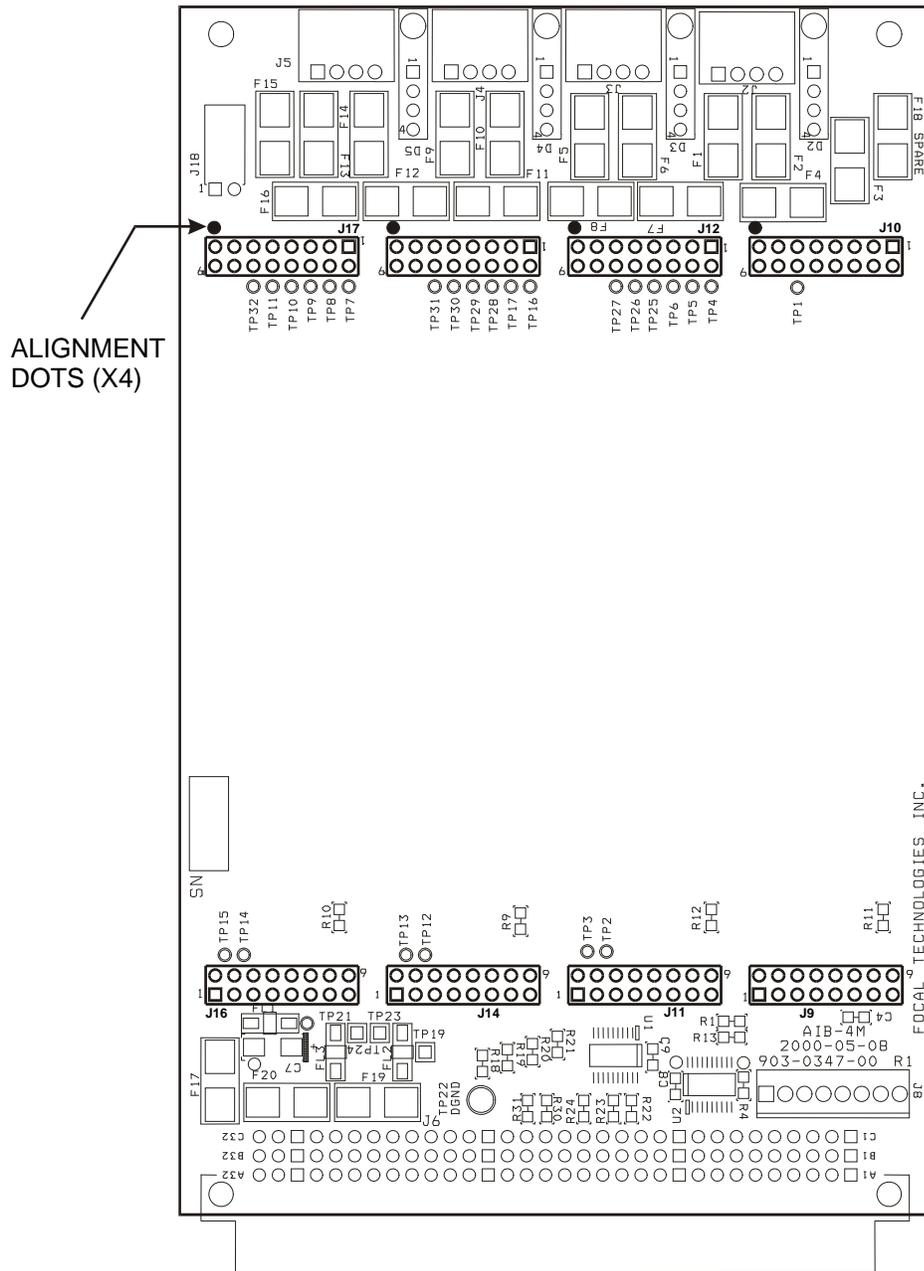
Adaptable Interface Board (AIB-4) PCB
